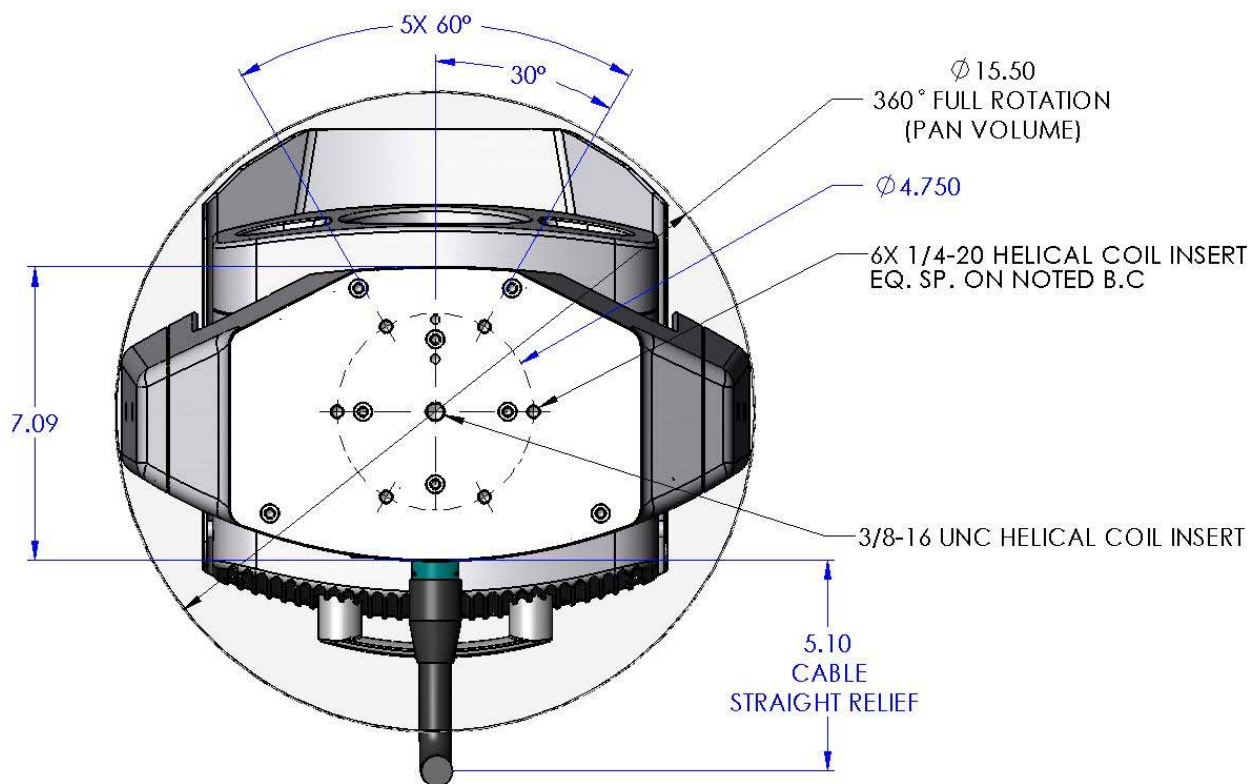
PTZ-35x140MS Dimension Drawing w/ hole pattern (inches)
